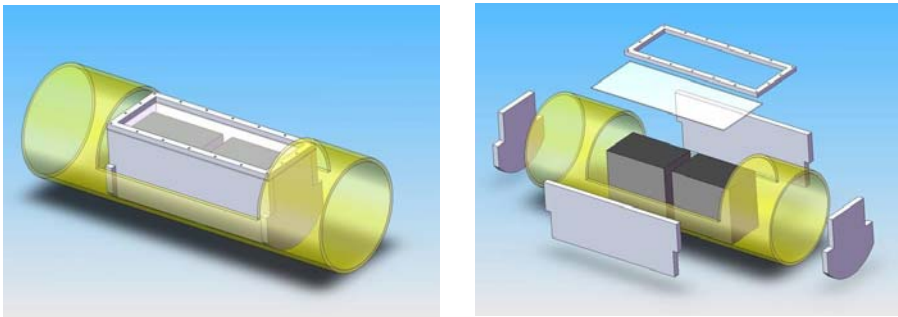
Multi-battery Housings. Normal and exploded view of the first design consideration placed within the boat hulls
